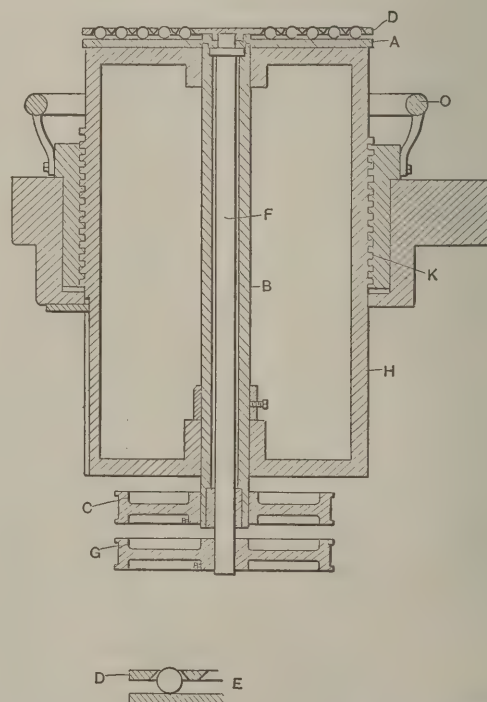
Details of Principal Parts of the Putnam Grinding Machine
